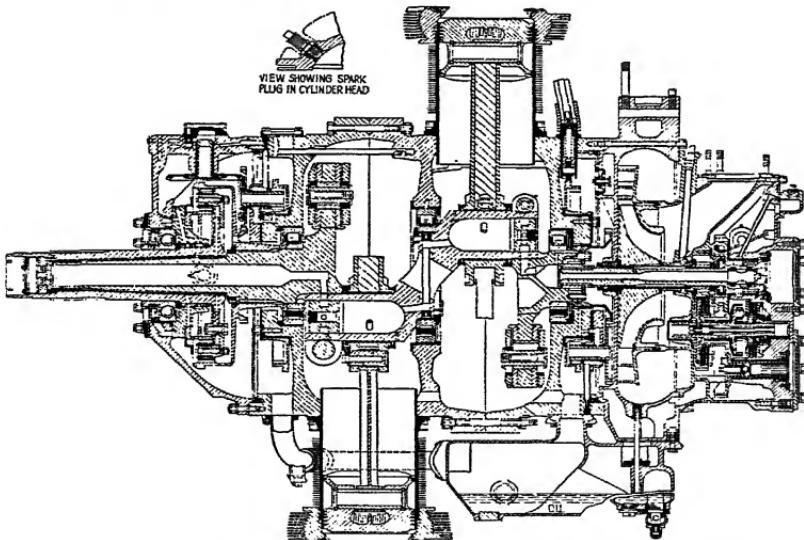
Section through both banks of cylinders showing bearings and oil passages.
